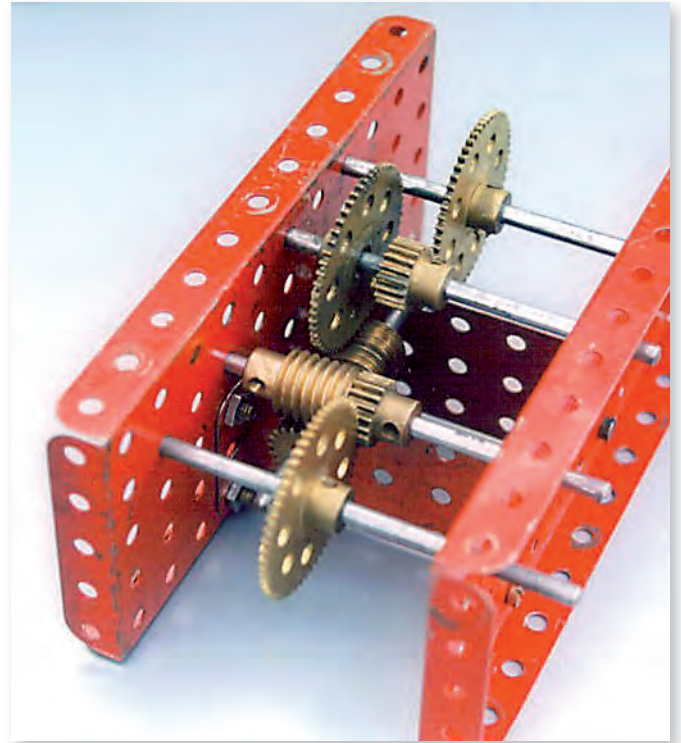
Using Meccano plates for the gear box. All the holes on the plates are standard-sized and positioned on the plates.
